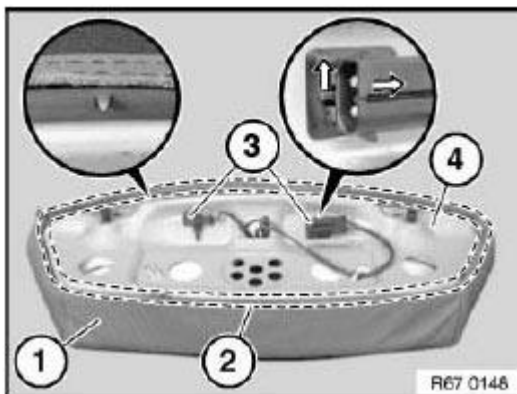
Identifying Seat Cover Area, Plug Housing And Trim
